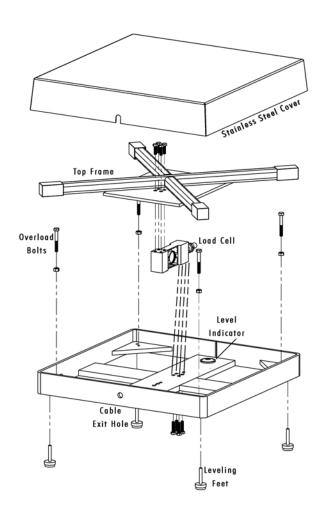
EXPLODED VIEW OF 12" X 12" OR 18" X 18" SCALE SHOWING SELECTED PARTS
